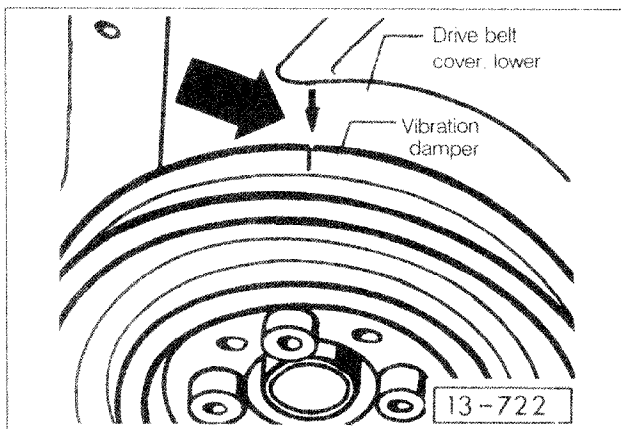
Crankshaft timing marks on vibration damper and lower drive belt cover on PL (16-valve) engine.
